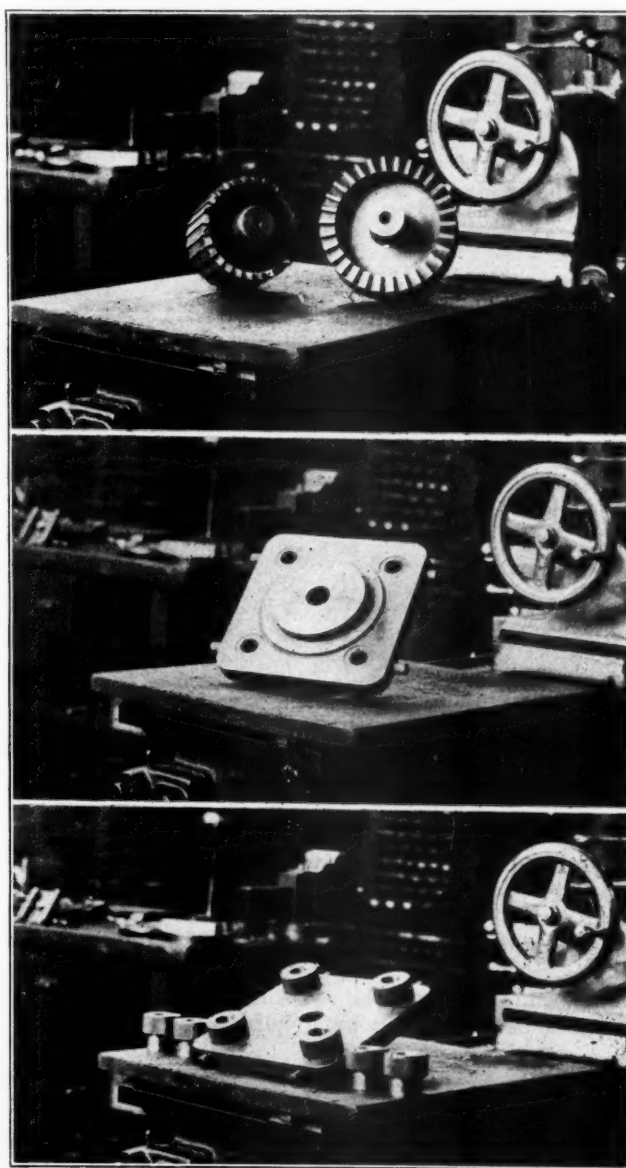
Top: End mill type of boring tool used for cutting feedwater heater connection holes in the cylinder saddle; Center and bottom: Jig used for drilling and tapping four stud holes for the pipe connection
